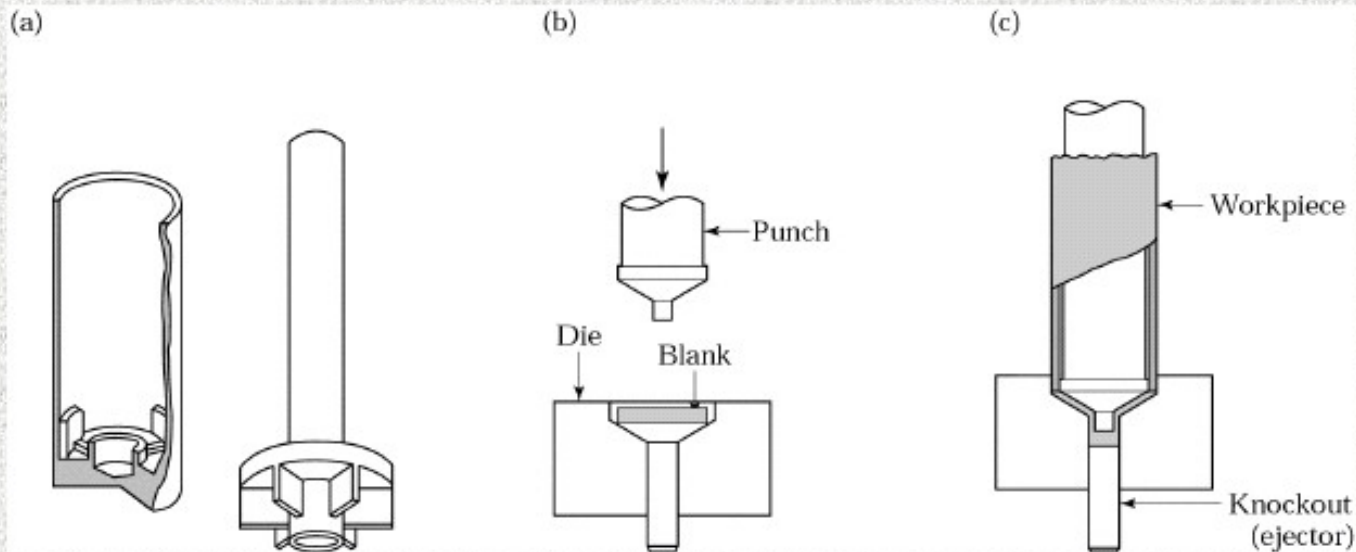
(a) Two examples of products made by impact extrusion. These parts may also be made by casting, by forging, or by machining; the choice of process depends on the dimensions and the materials involved and on the properties desired. Economic considerations are also important in final process selection. (b) and (c) Impact extrusion of a collapsible tube by the *Hooker process*.
